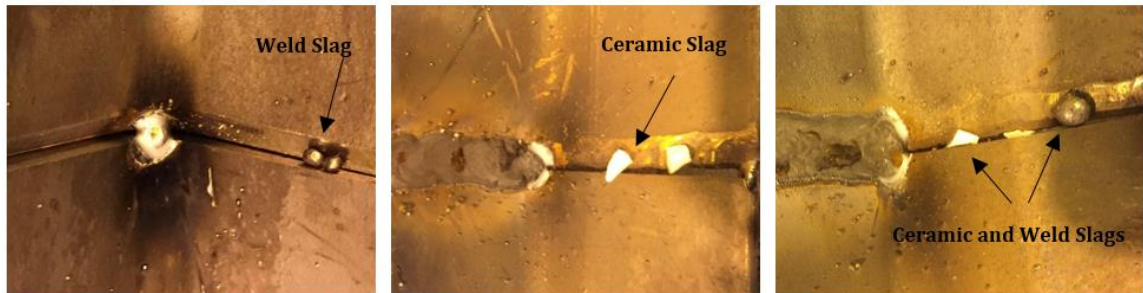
Manufacturing inclusion in the welds using slag (method a)
